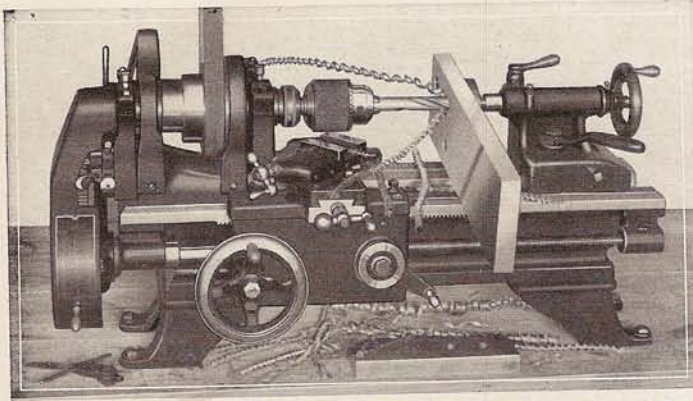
Drilling a Piece of Flat Steel using a Drill Chuck in the Head Stock and Feeding by Hand Wheel of Tail Stock
